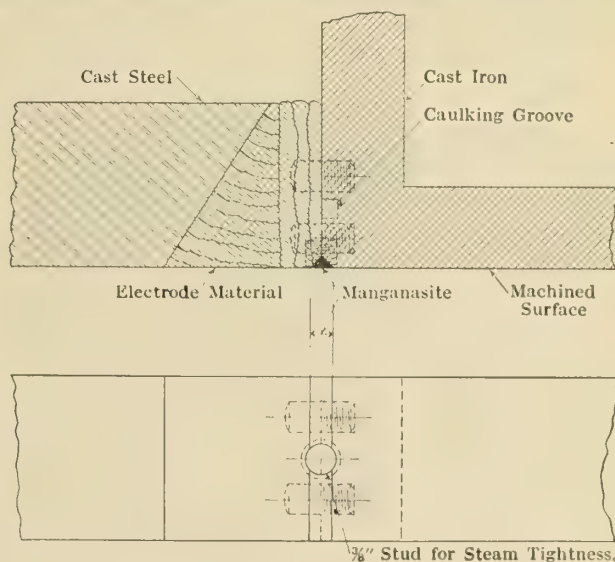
Method of Making Weld Steam-Tight
